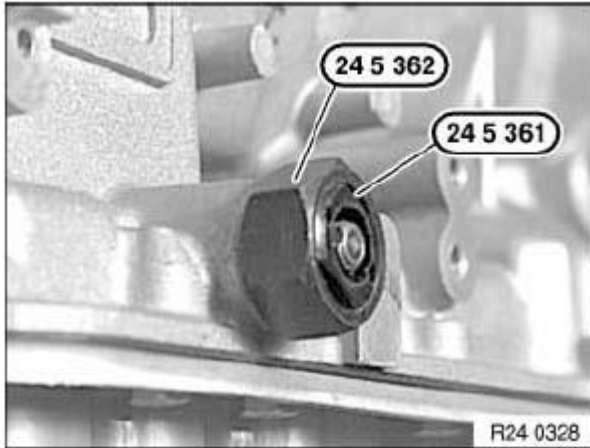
Identifying Special Tool 24 5 362 Onto Special Tool 24 5 361
